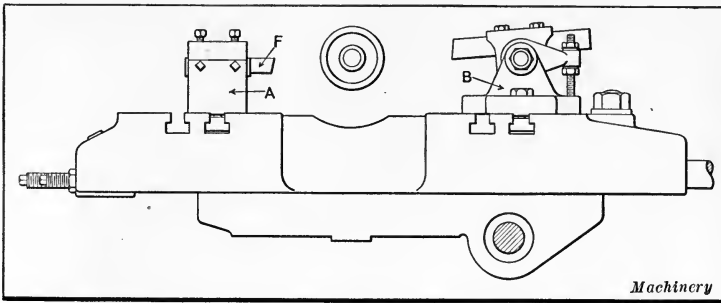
Diagram showing Arrangement of Cross-slide Tools for Forming and Cutting of Piece shown at B in Fig. 18
